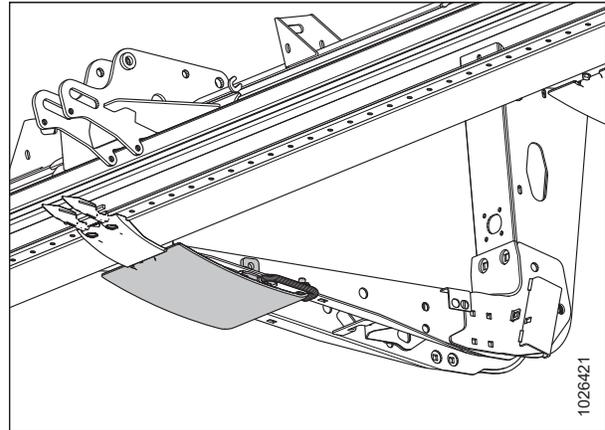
Center Skid Shoe – Inboard Shown, Outboard Similar
